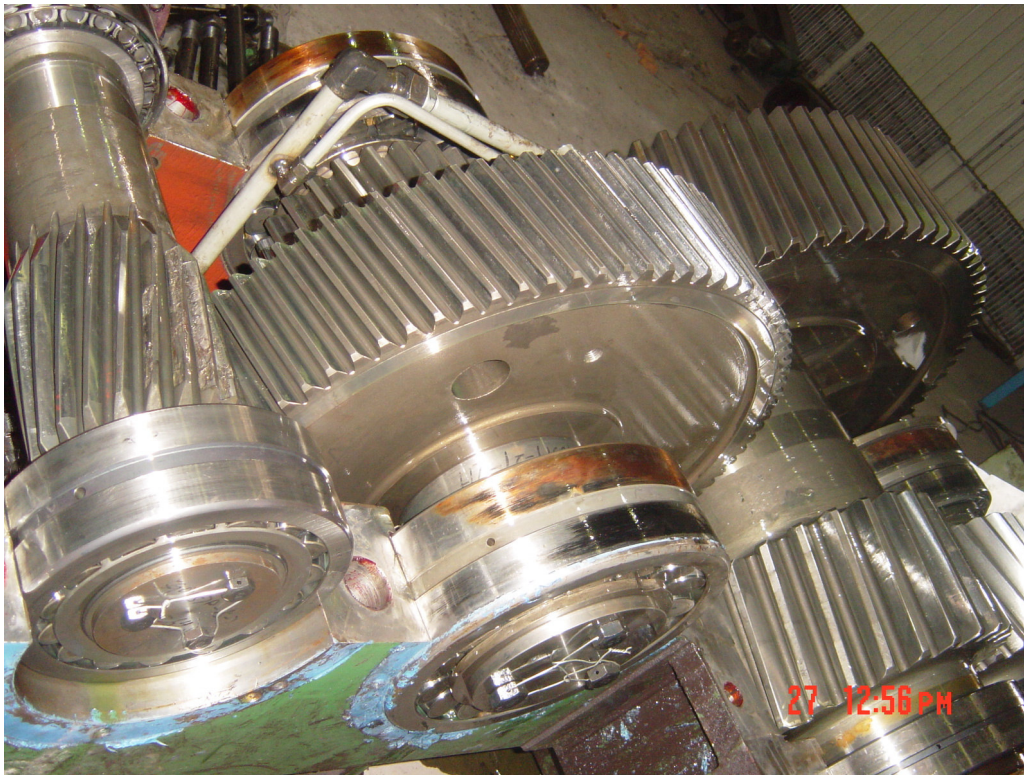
photo in one fault diagnosis of a high-speed wire mill gearbox
